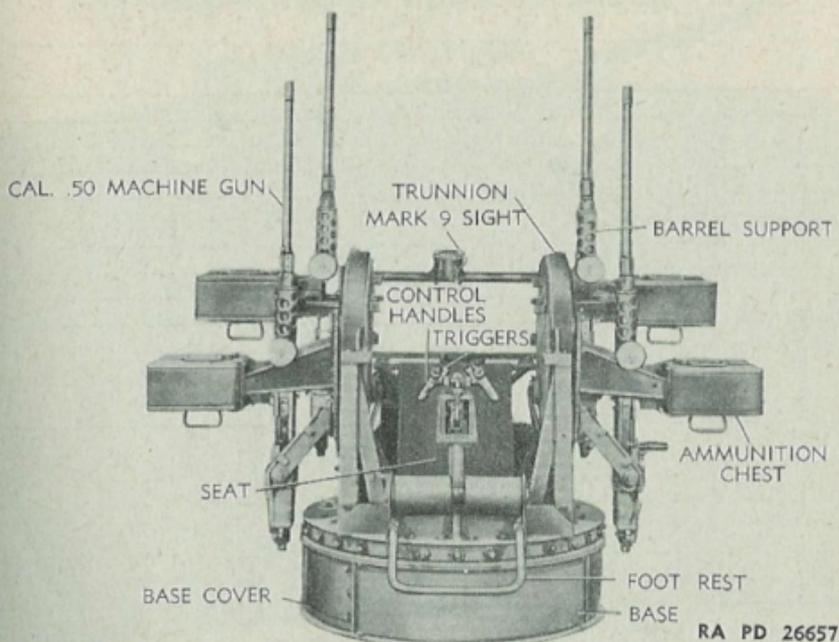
Multiple Cal. .50 Machine Gun Mount M45—Guns at 90-degree Elevation—Front View
